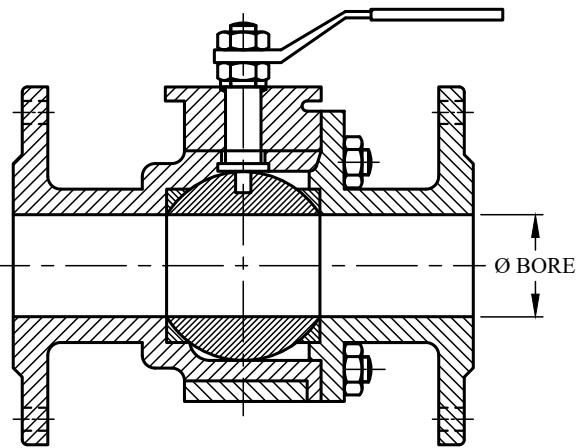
B TWO PIECE FLANGED ENDS CONSTRUCTION
